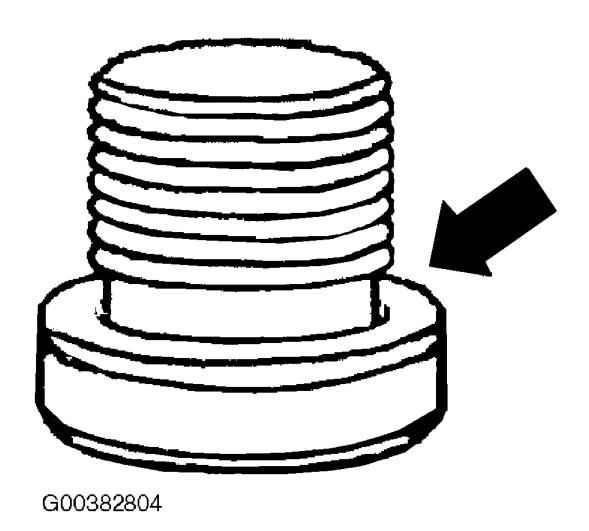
Identifying ATF Control Plug Seal Courtesy of VOLKSWAGEN UNITED STATES, INC.
